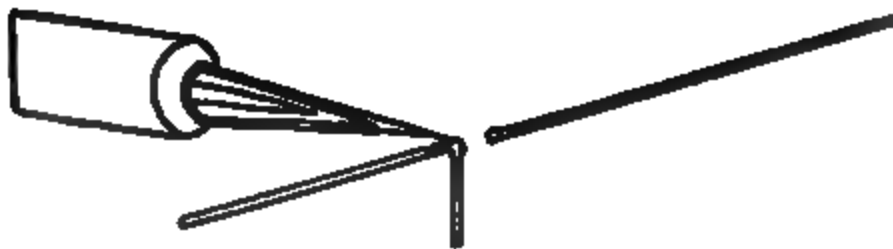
Shows method of soldering a break near one of the pins. Let the pin hang downward and the solder will hold it in place while the union is being made with the other piece.
